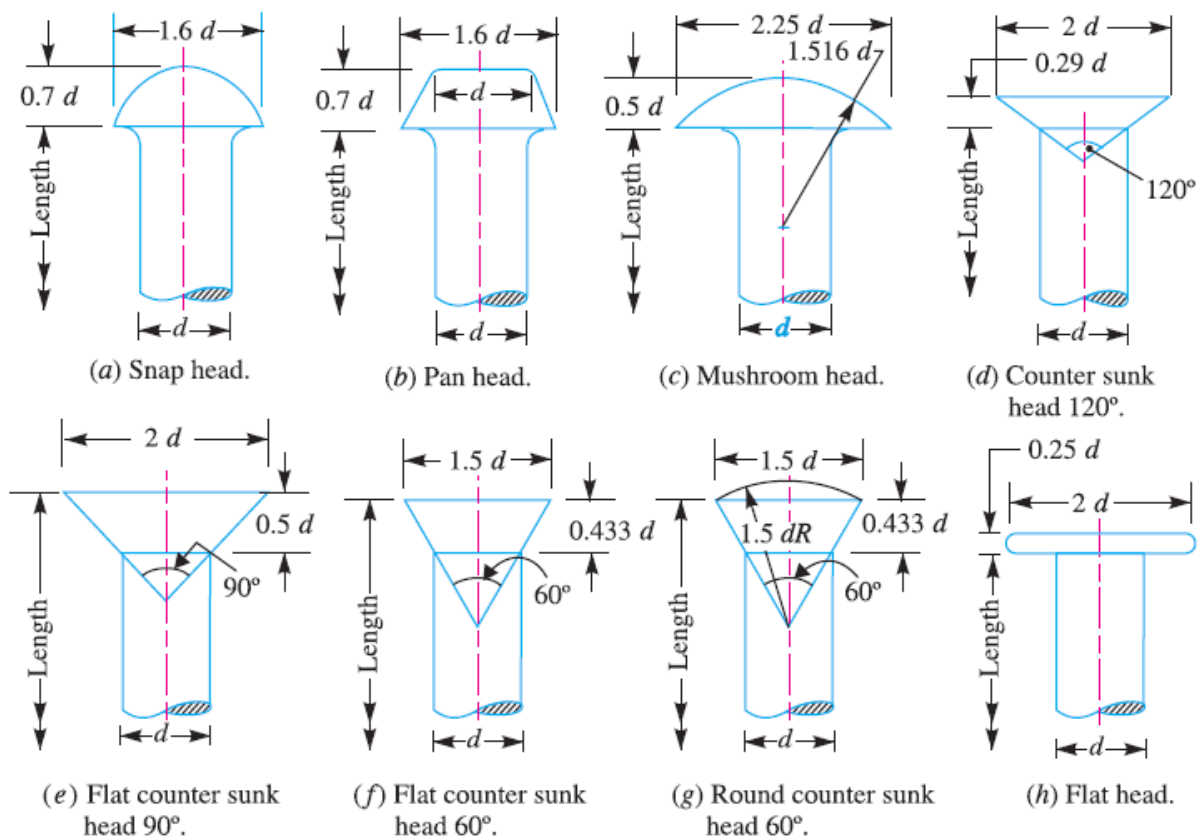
3). Rivet heads for general purposes (below 12 mm diameter).
